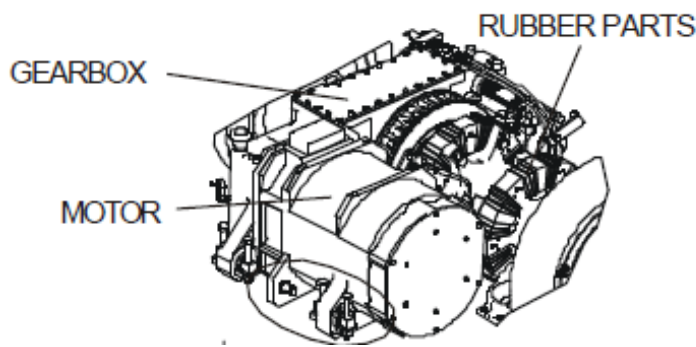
Gearbox and Motor – Courtesy of Hiawatha Transit
